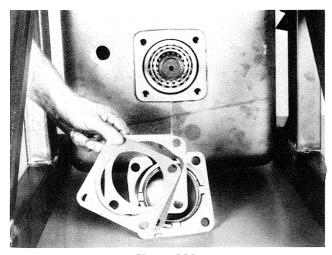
Position shims on front bearing cap. Install bearing cap and shims on output shaft.
